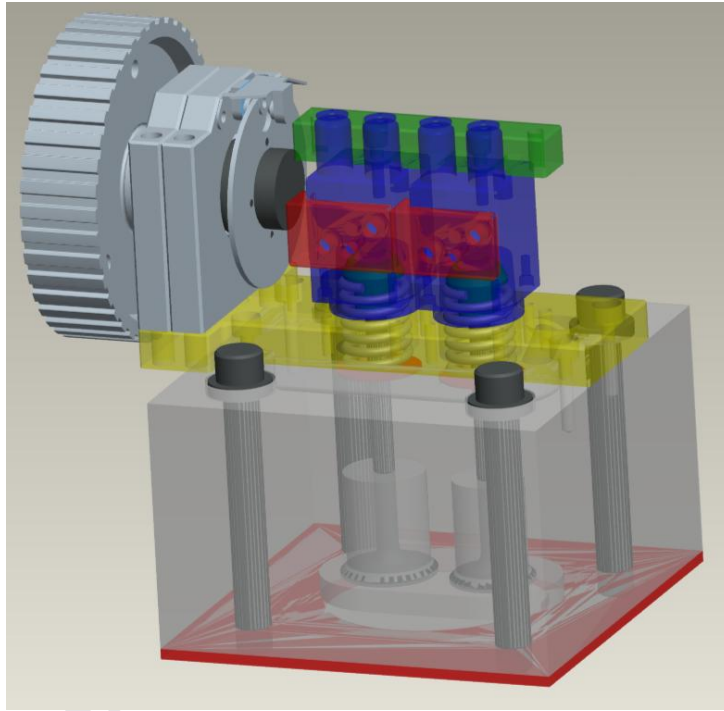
Pro Engineer 3D Rendering of The Cylinder Head and FVVA Valvetrain Assembly (Excluding Fasteners).
